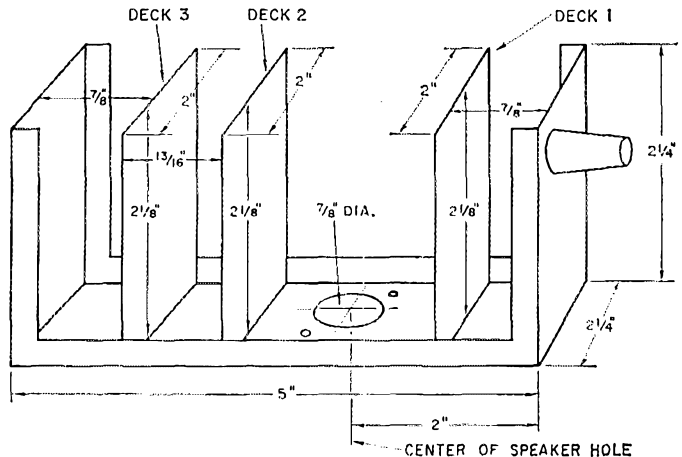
Sketch showing the arrangement of decks in the aluminum enclosure.
